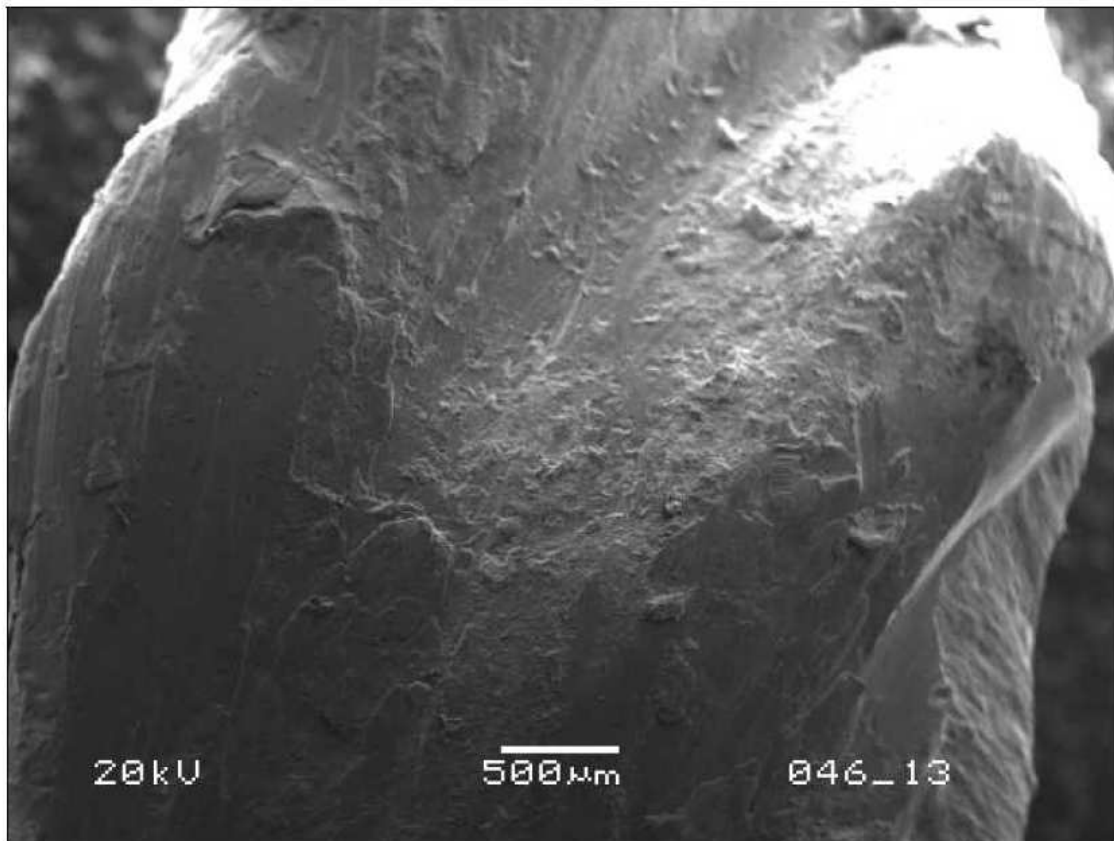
Side view of dull fracture end showing significant rubbing and forging damage.
